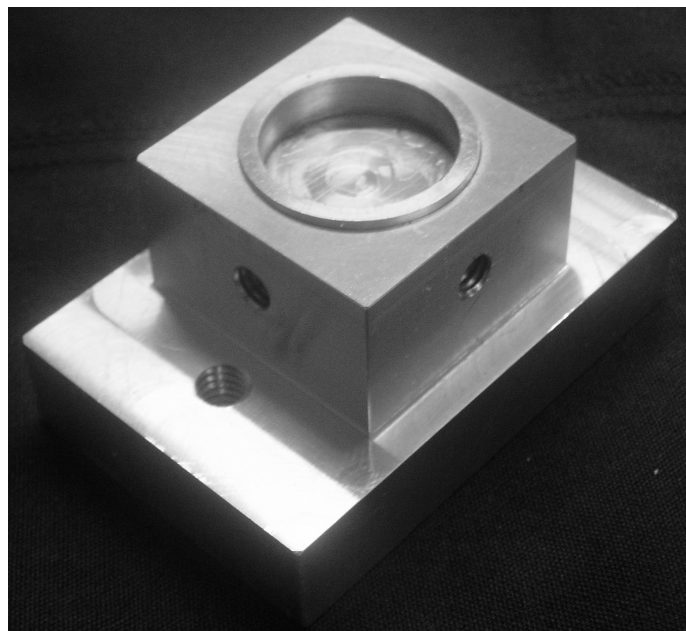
Adapter Used to Connect Reverse Section of Shaft to DVL
